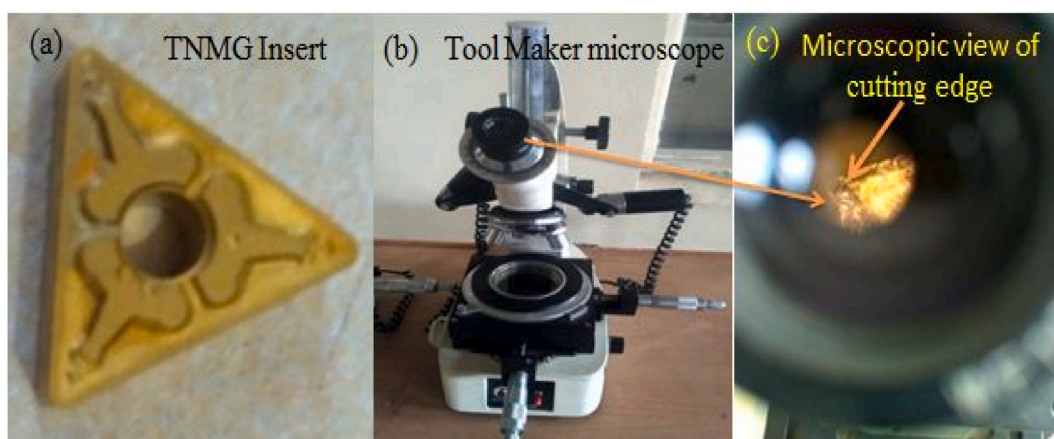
Tool wear of TNMG insert on tool maker microscope.
